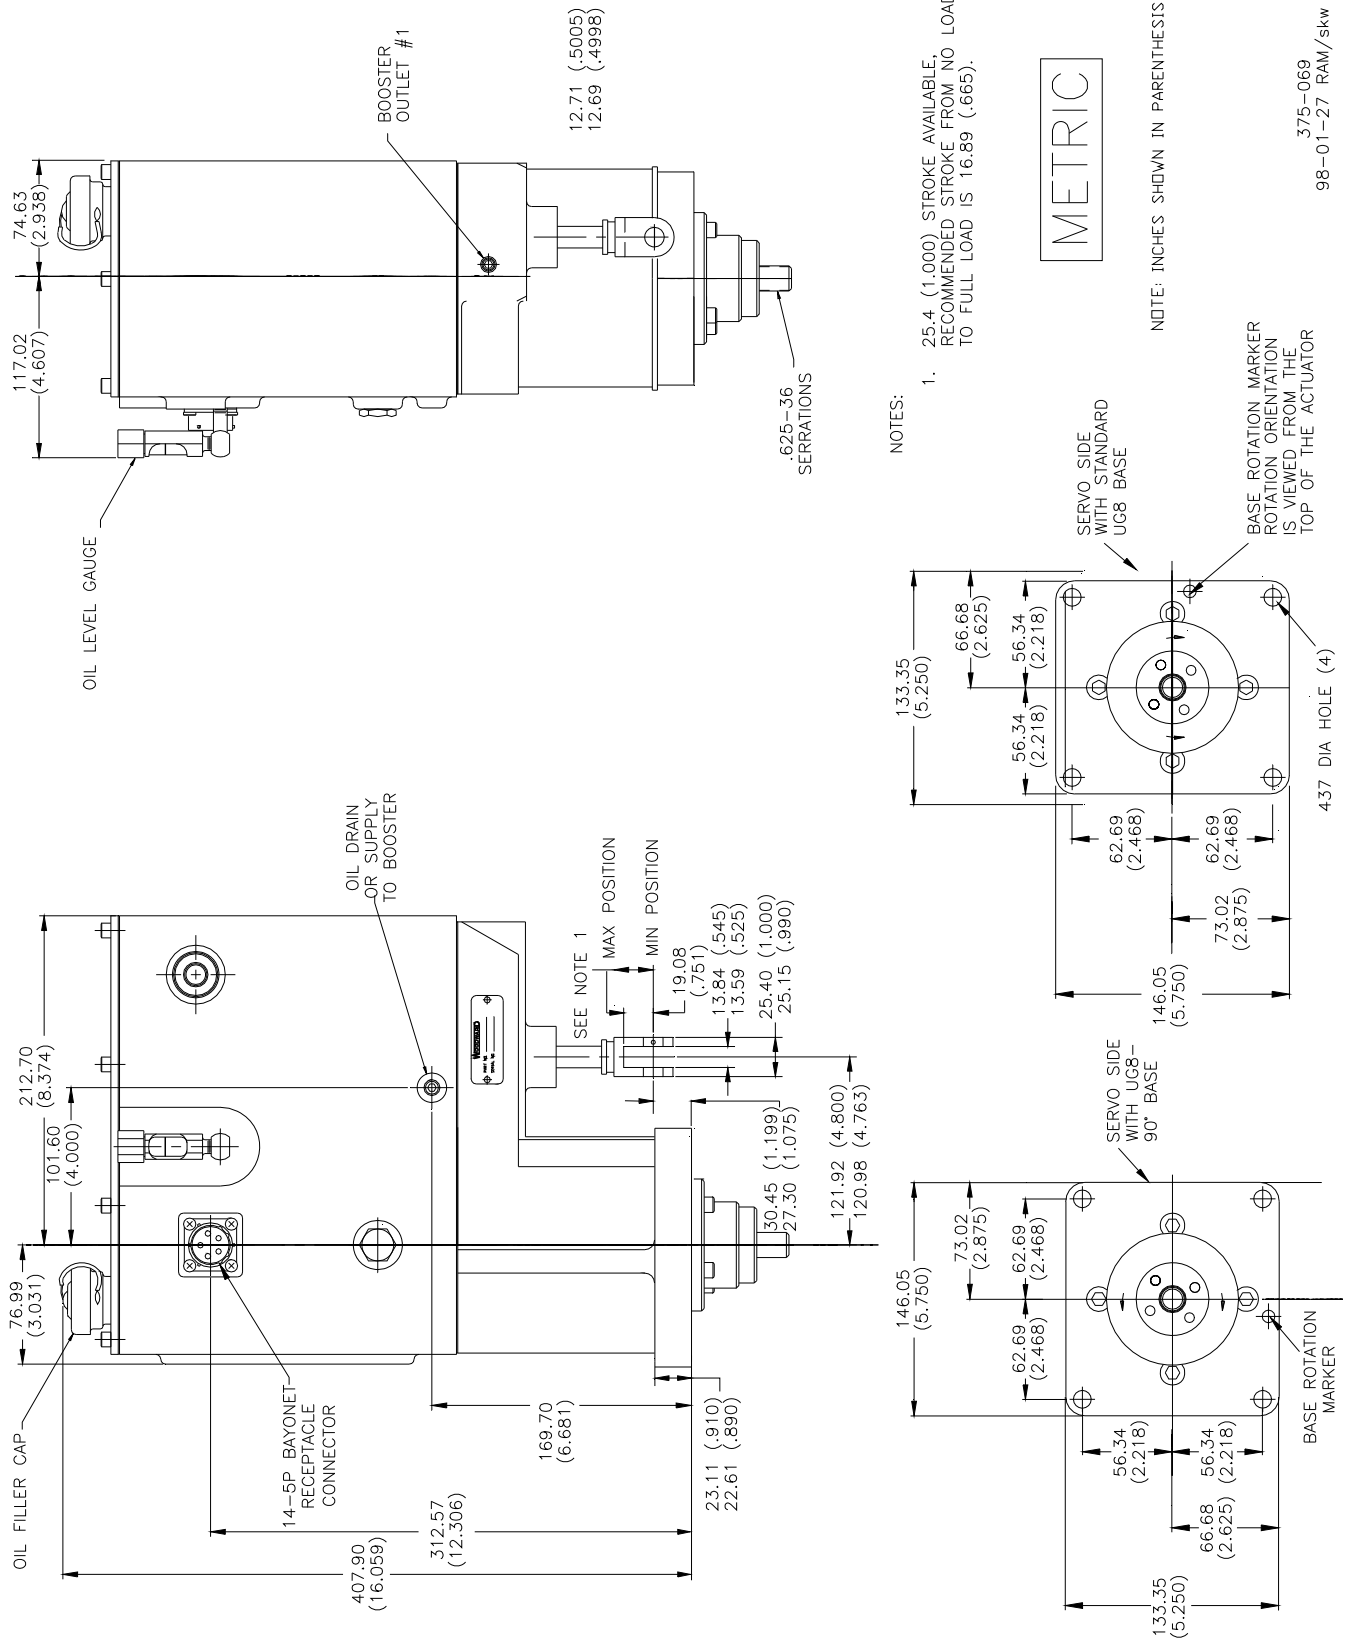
Outline Drawing of PG Actuator (linear output/UG base)
